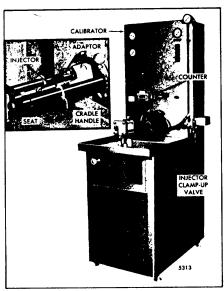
Injector In Calibrator J 22410 through the adaptors. The fuel passages in adaptor J-7041 130 are cross drilled.
